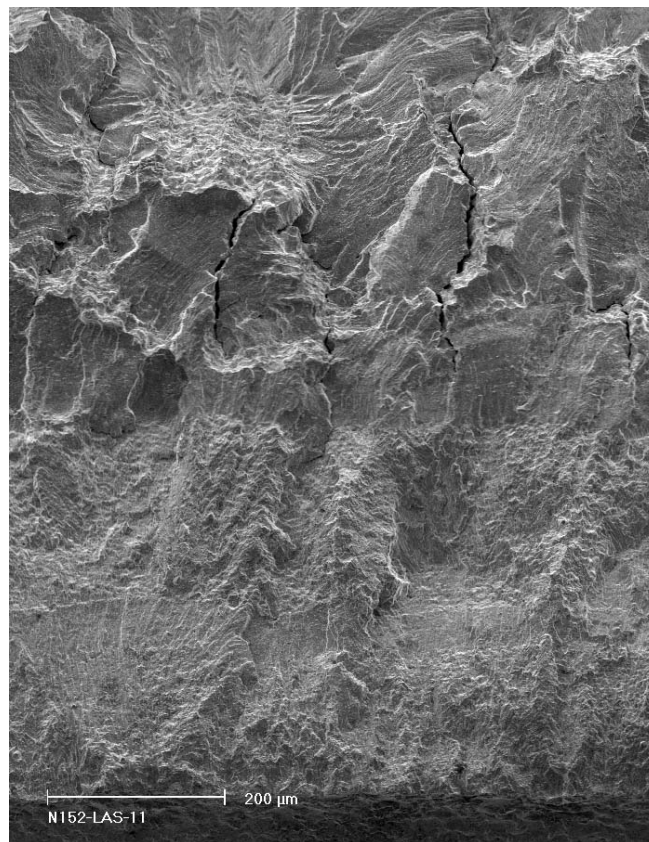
Fracture surface of specimen N152-LAS-11. Crack advance is from bottom to top.
